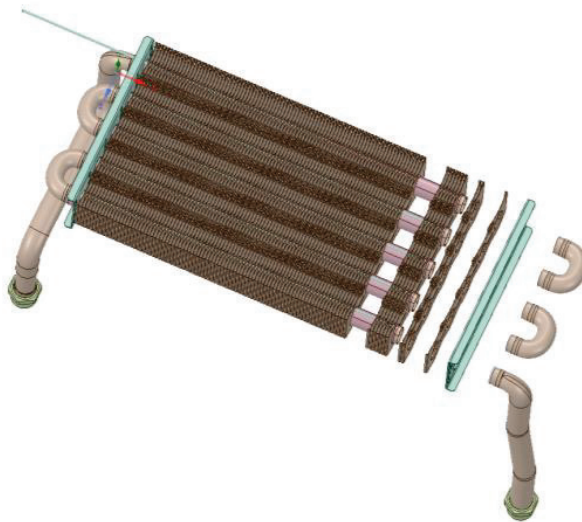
Exploded view of a FTHEx in a combi boiler systems<sup>3</sup>
